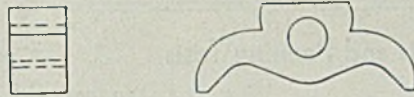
Proper selection of steel for this screw machine clutch lever aided in production of a long-wearing part
